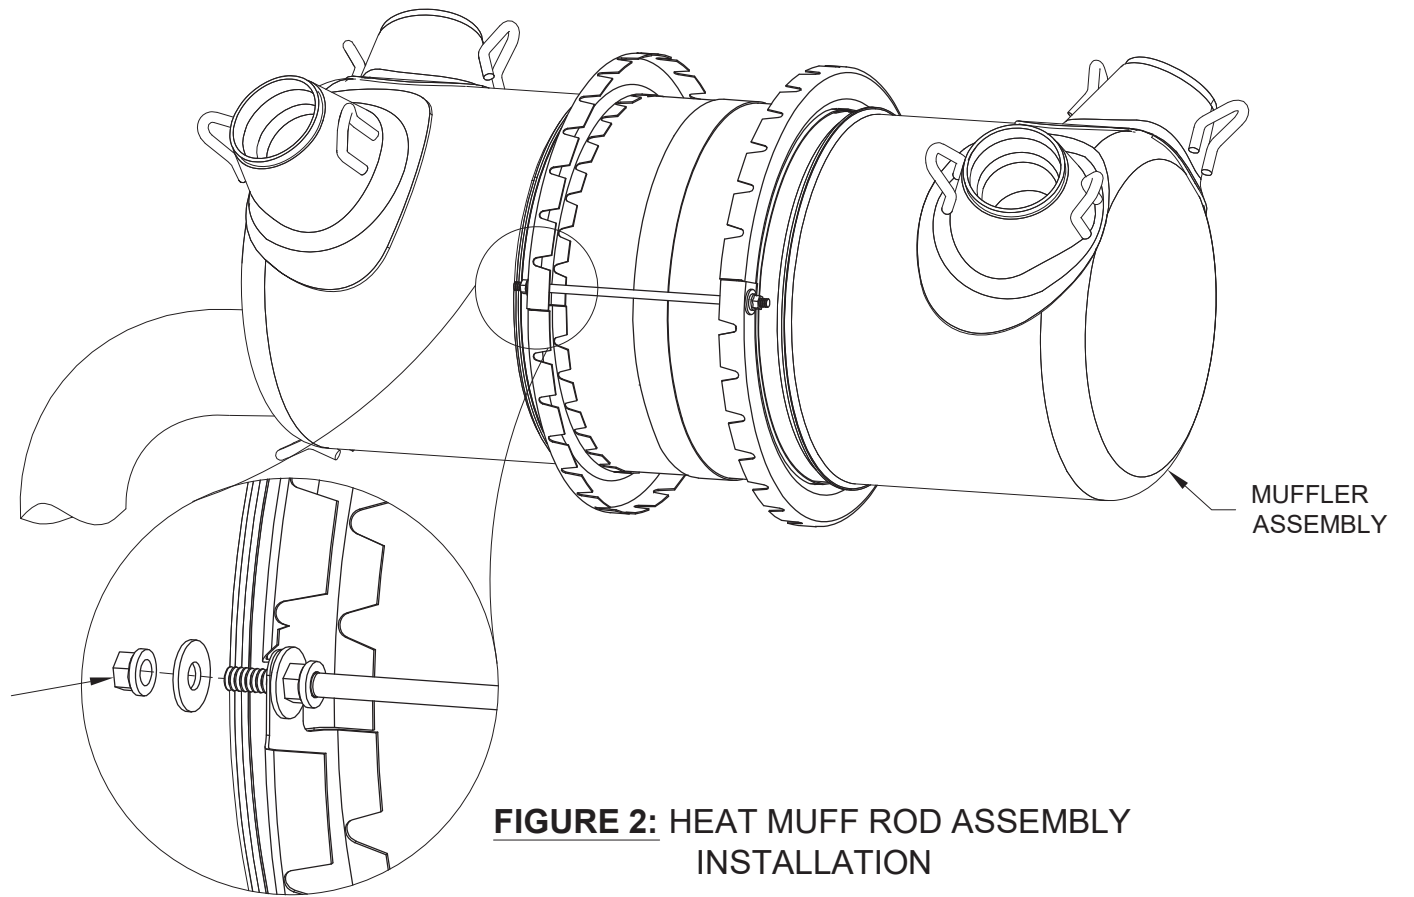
HEAT MUFF ROD ASSEMBLY INSTALLATION
